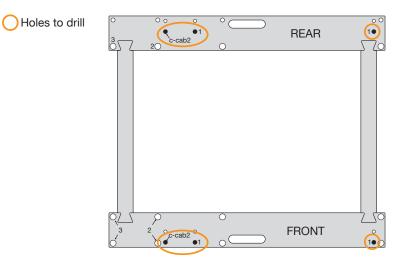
Holes to drill for 1 C-Cab + 1 C-Cab ext. installation
